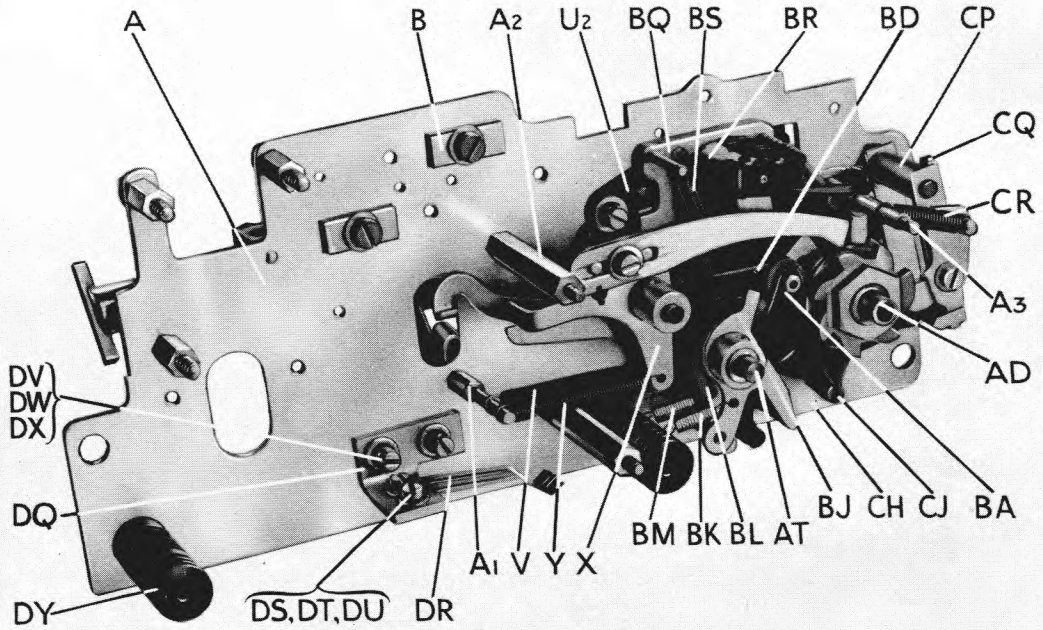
TRANSMITTER UNIT S3744B (PARTIAL ASSEMBLY)
